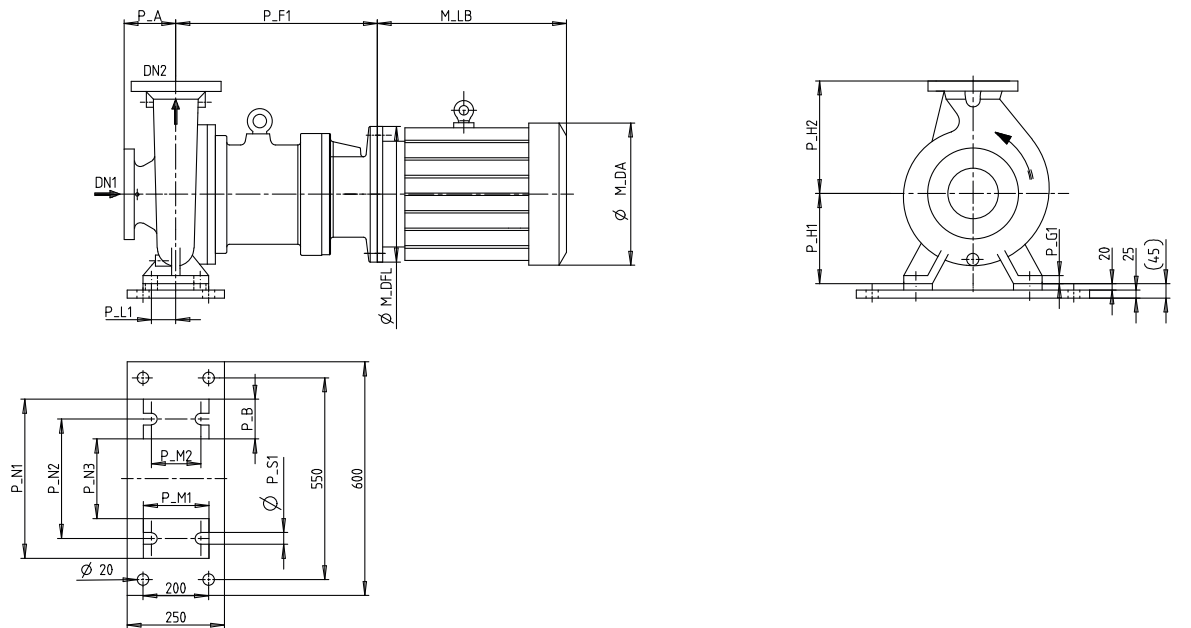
Dimensions for installation with mounting plate and shims, without support foot
